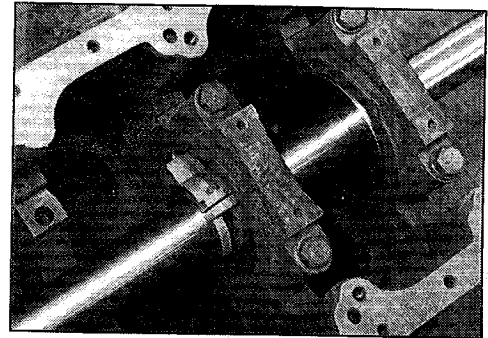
CUTTER HOLDER ATTACHED TO BORING BAR
